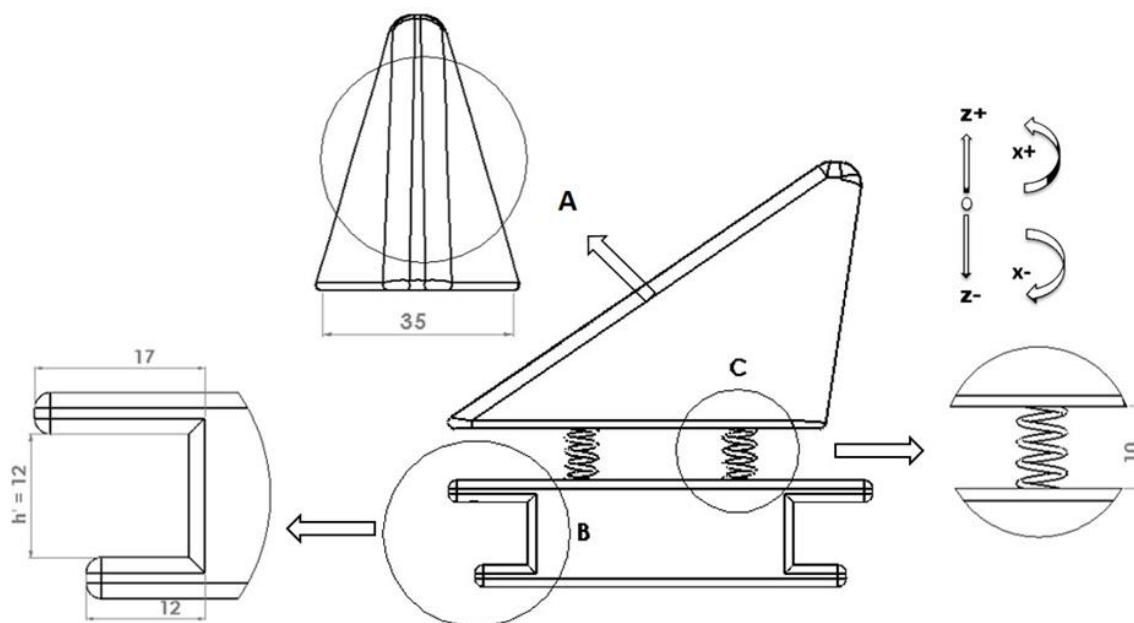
VC prototype technical drawing (This prototype was draw and designed with Solidworks program)
